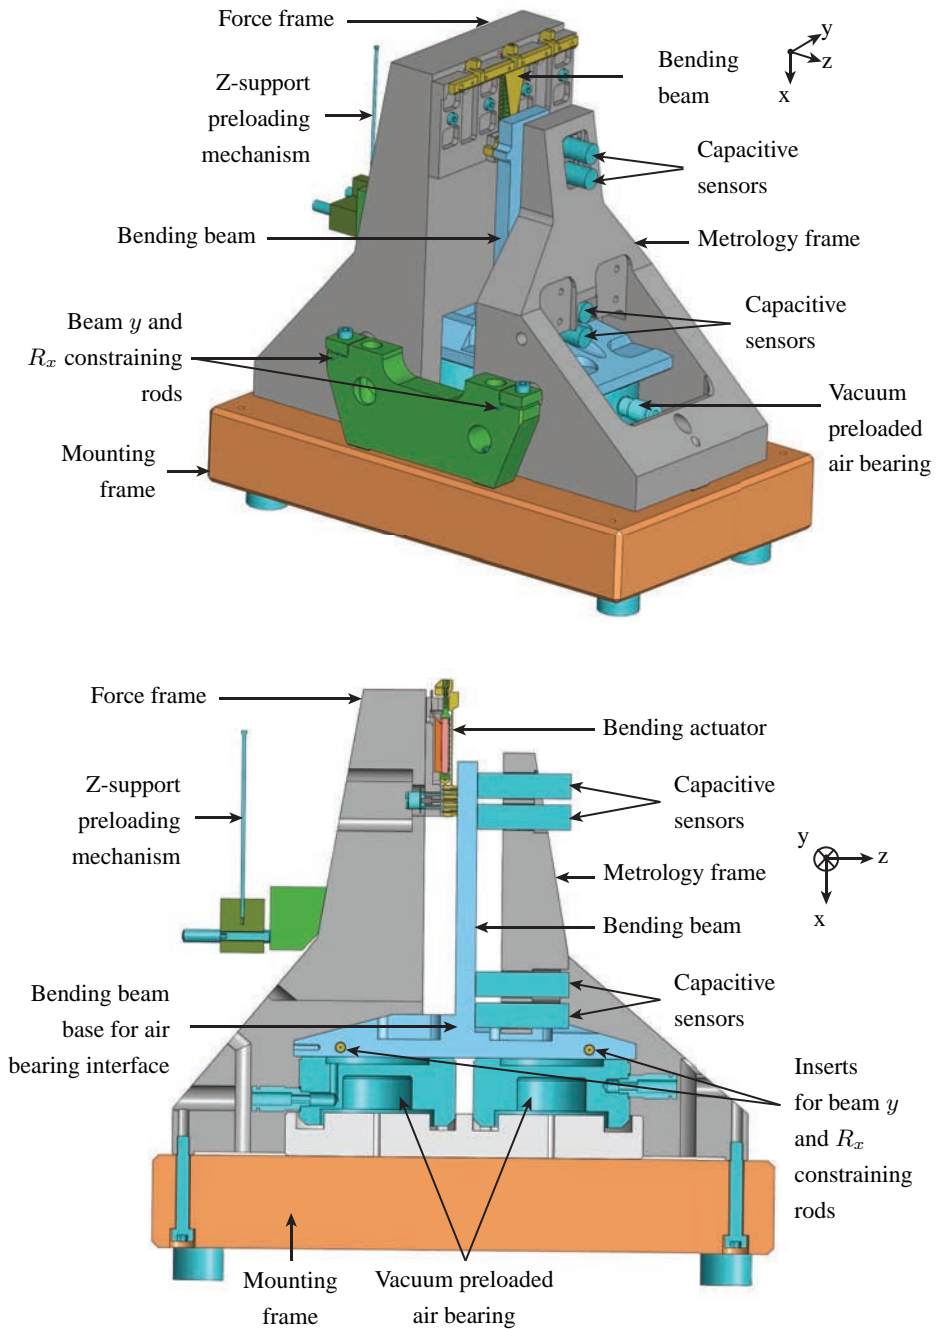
CAD design of the Single-Axis Functional Model. The top picture provides a 3D view and the bottom picture a cross section of the design.
